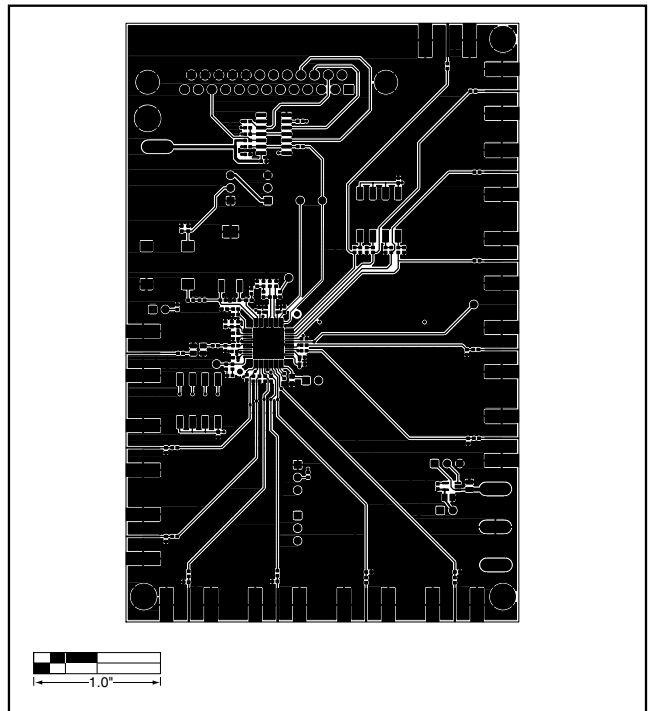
MAX2745 EV Kit PC Board Layout—Component Side
